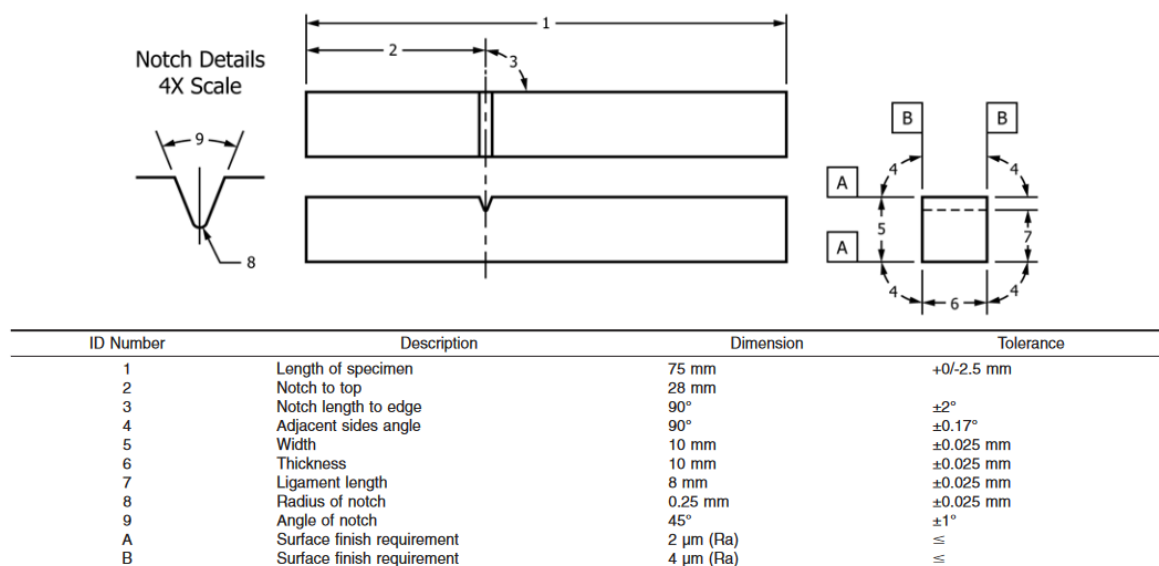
Izod Test specimen dimension specified in ASTM E23 (2016)
